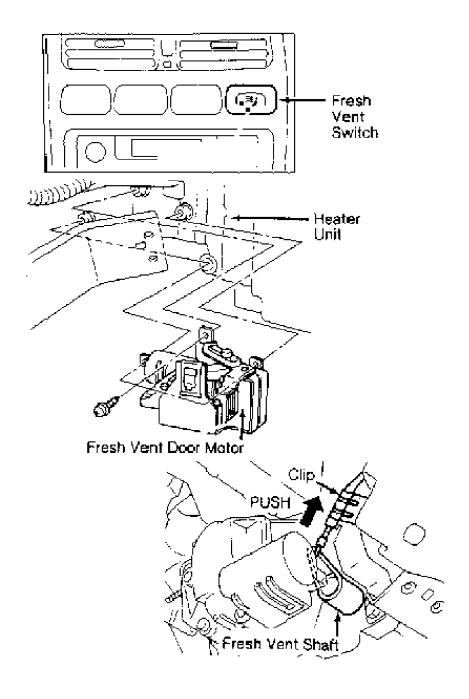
Adjusting Fresh Vent Door Courtesy of Nissan Motor Co., U.S.A.
